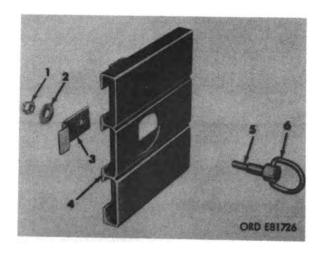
Removing or installing steering access lid, gun mount opening and engine access covers.
